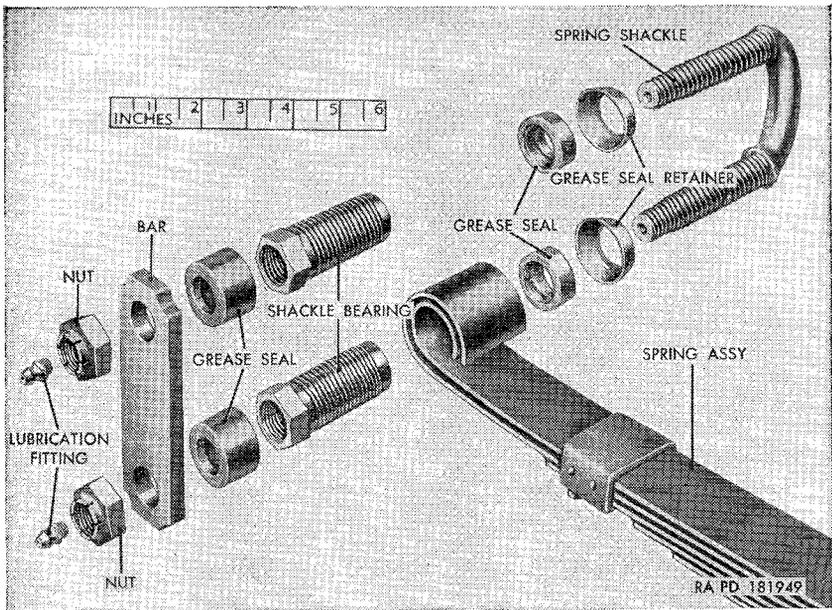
Spring shackle end of spring and spring shackle (M170)—exploded view.
